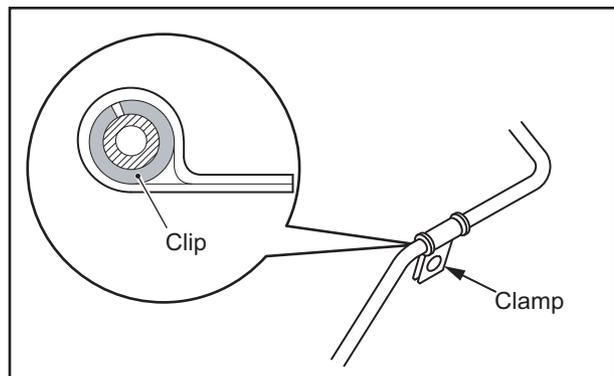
Low pressure fuel pipe and Clip - Inspect and Replace
